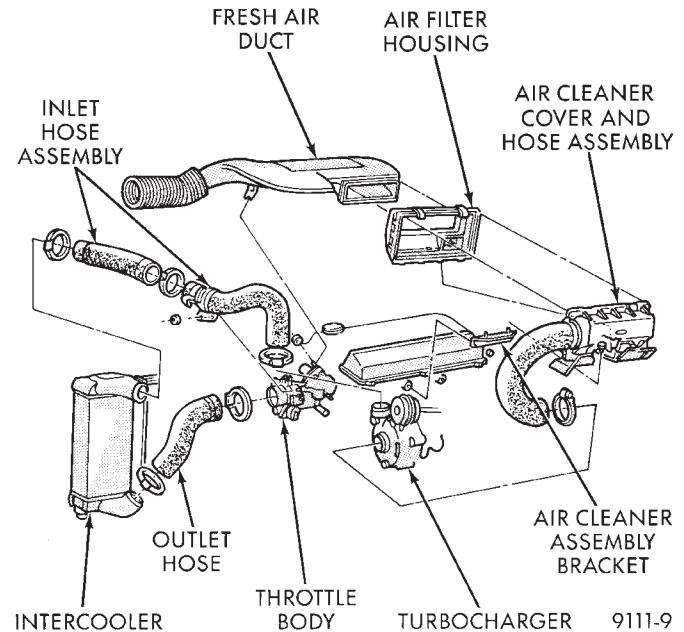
Air Cleaner and Throttle Body Assembly—Turbo III Engine
